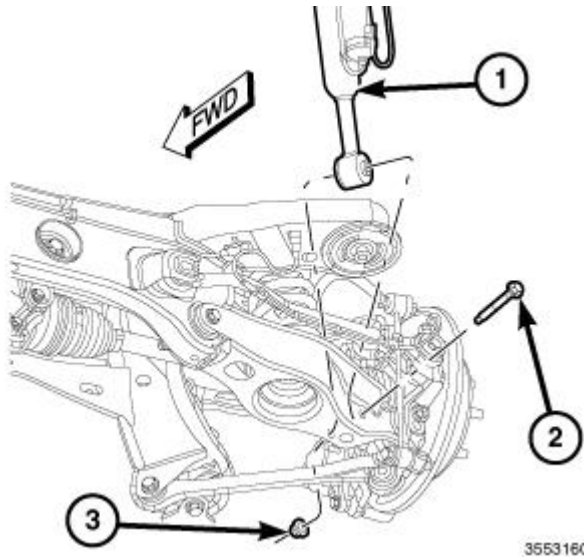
Lower Mounting Bolt, Nut & Shock Absorber
